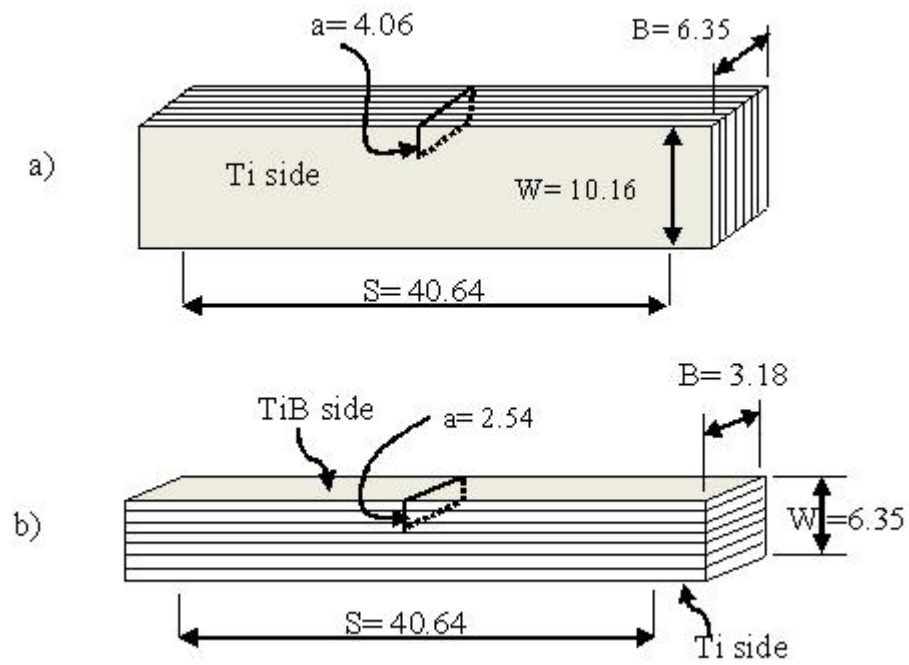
Three point bend specimen (a) FGM graded in the thickness direction (b) FGM graded in the crack direction (all dimensions are in mm)
